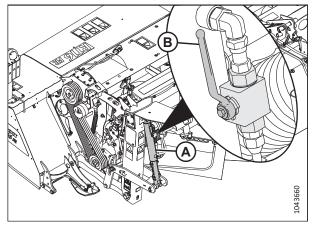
Auxiliary Lift Cylinders - Unlocked (Open)
